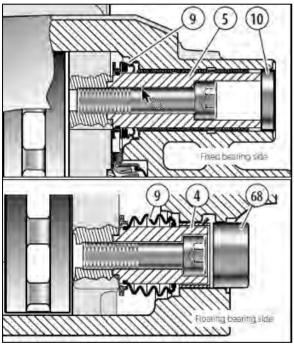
CHECKING OF GUIDE PIN AND SEALS
